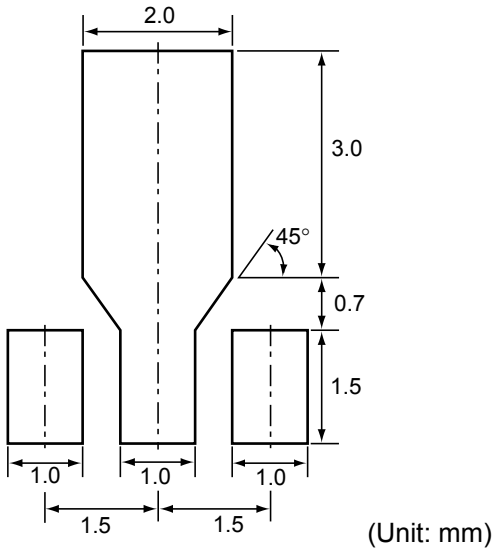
Dip Soldering for SOT-23/TO-92 (Reference)
